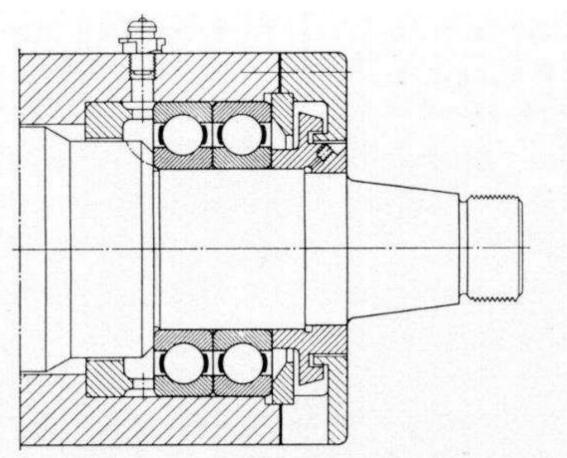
Grease escape valve for high-speed grinding spindle bearing arrangement
